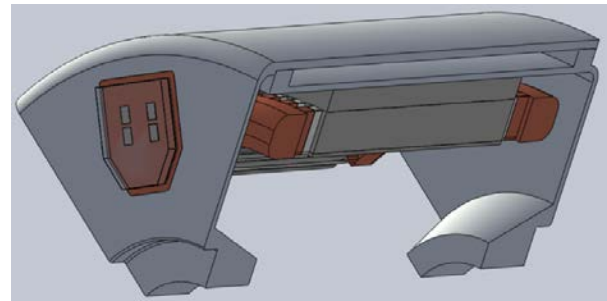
Axially integrated CAD model based on the BMW i3 traction motor and SiC power devices: one-phase power module with one-sixth of the motor.
